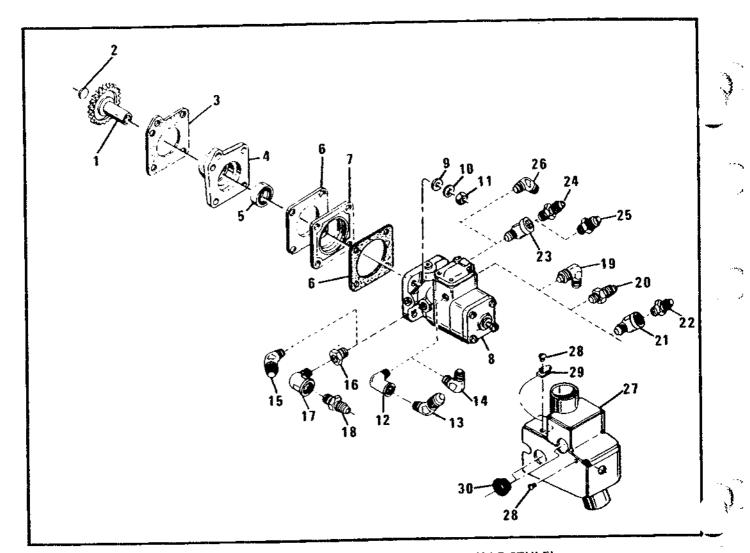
FUEL PUMP ASSEMBLY, COMPLETE (OLD STYLE)
